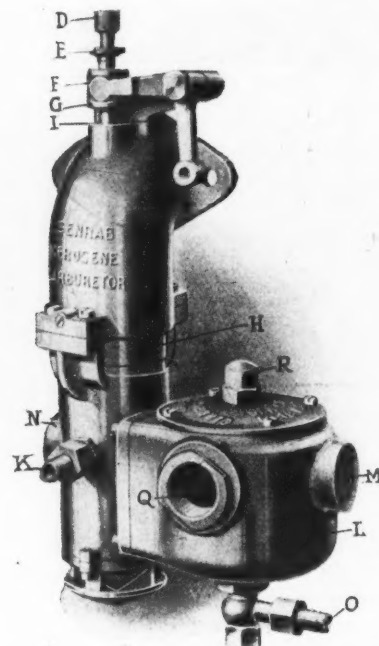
Exterior view of the Senrab carburetor which uses exhaust gas as the heating agent
